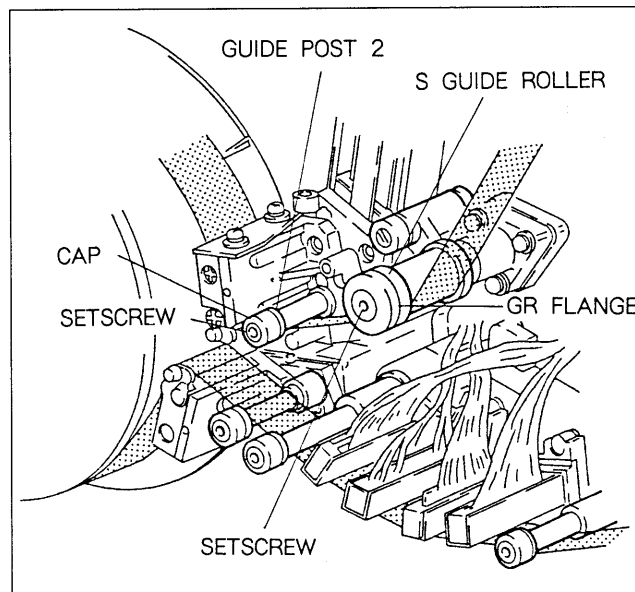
Guide Post 2 and S Guide Roller
